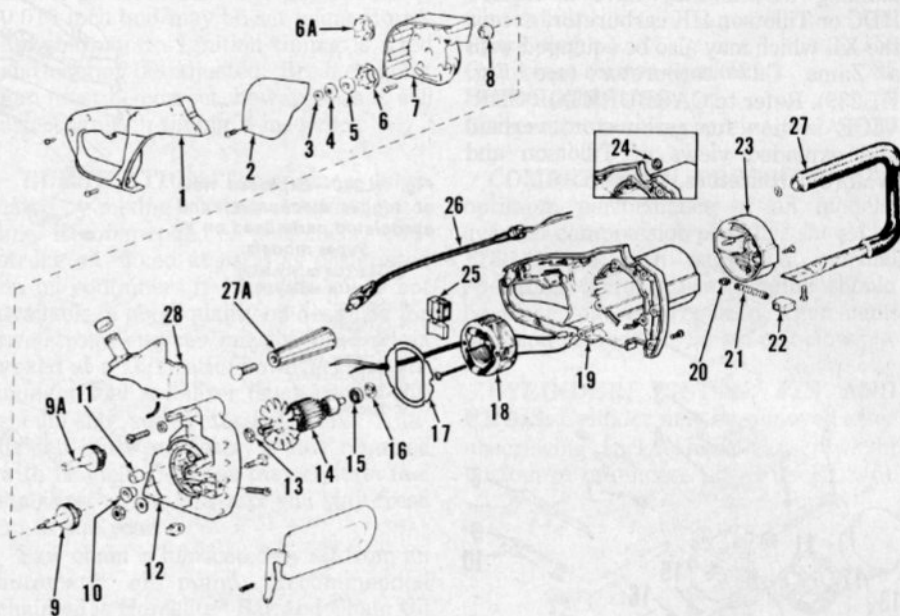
Exploded view of XEL electric chain saw. Components 6A, 9A and 27A are used on XEL 8 and XEL 10 saws.
